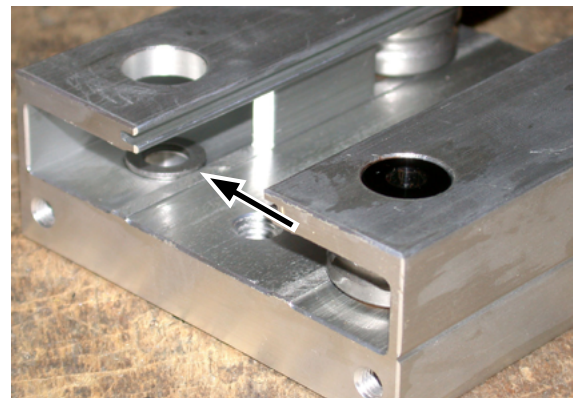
Make sure the spacer is in its proper position before inserting the new bearing.
